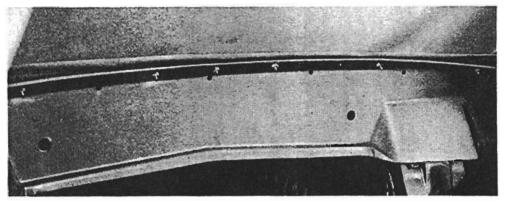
Loosen the Belt Moulding Retaining Nuts So the Belt Moulding Can Be Pulled Out About 1/8 Inch.
